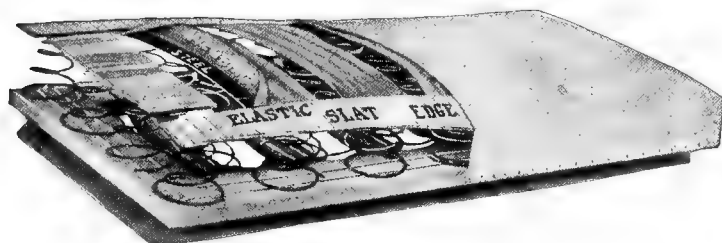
Spring Seat, Showing the Use of Slat and Webbing and the Elastic Slat Edge.
